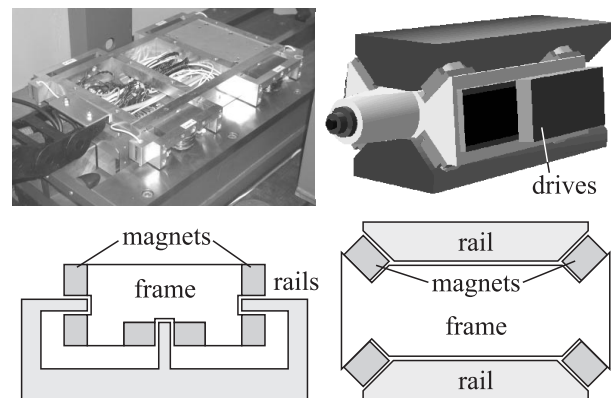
Prototype guide and model of new machine axis along with their magnet arrangements
